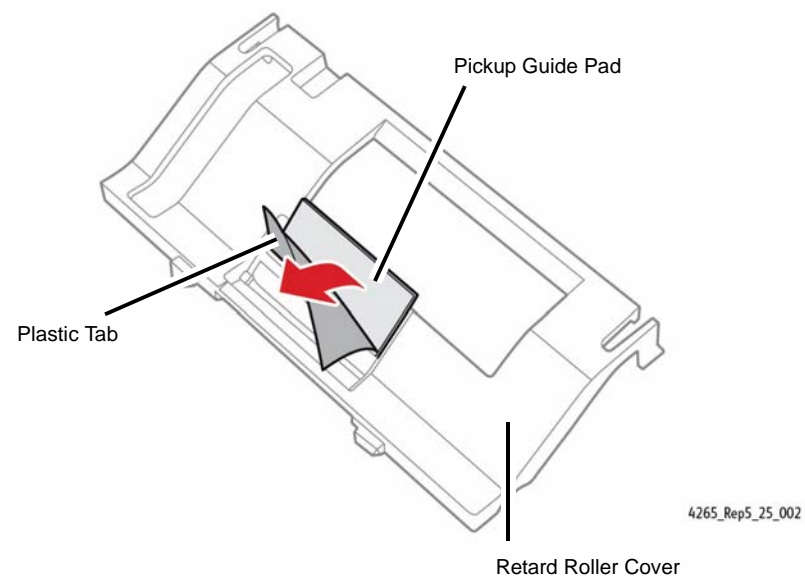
Inspecting/Replacing the Pickup Guide Pad
